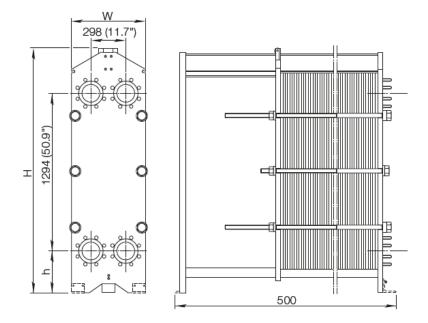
Dimensions of the plates heat exchangers used for the HE15, HE16
